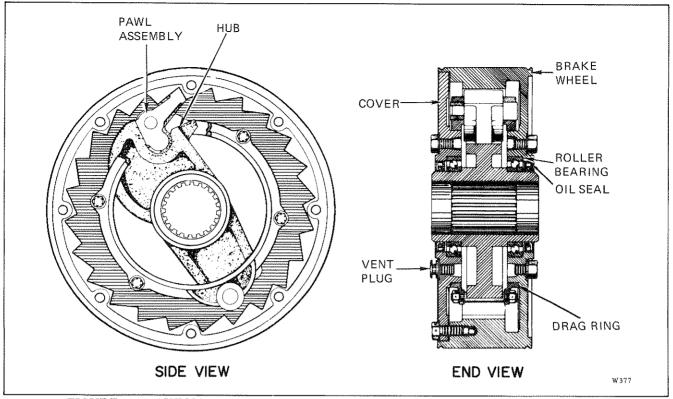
AUTOMATIC BRAKE ASSEMBLY (OPTIONAL) DIRECT DRIVE WINCH
